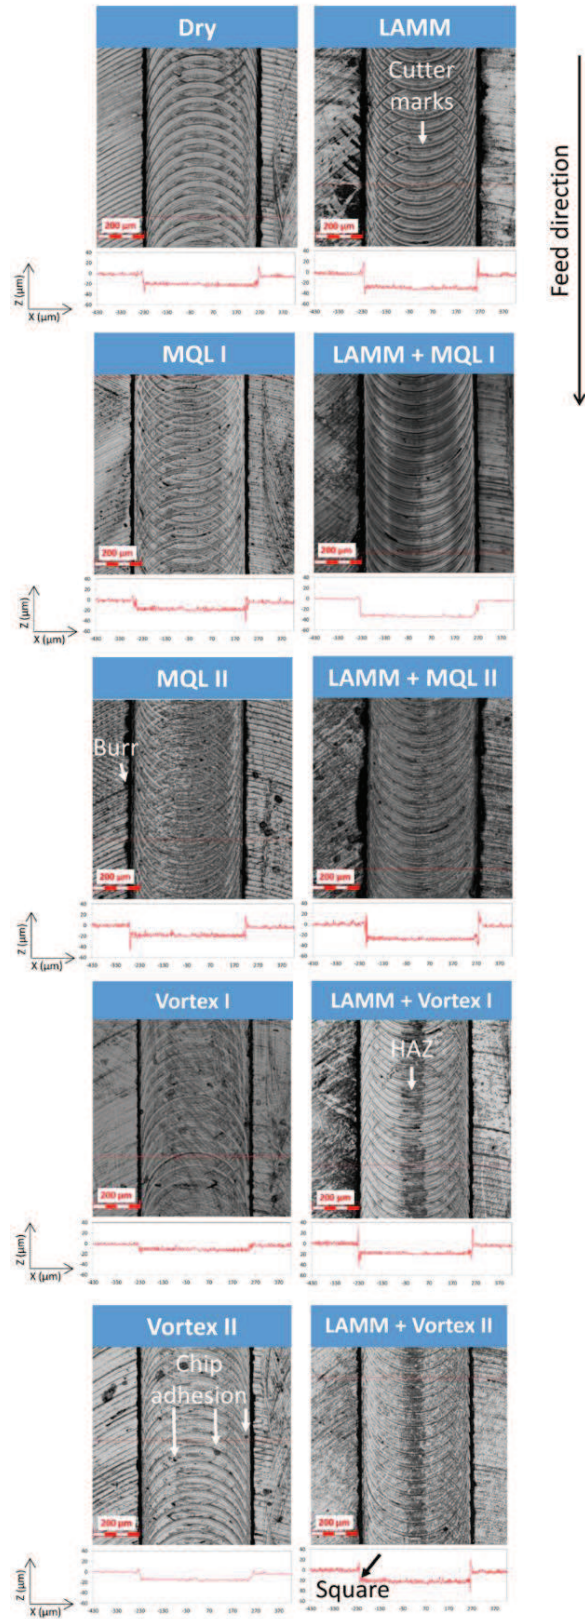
Surfaces of groove 1 and cross-sectional profiles.
